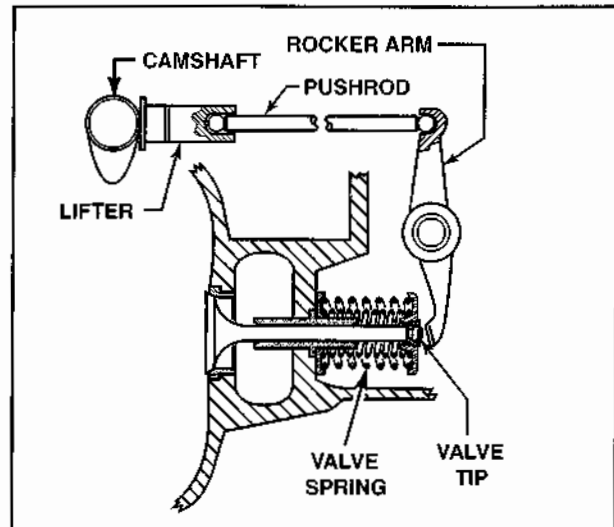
The typical valve operating mechanism includes a camshaft (or cam ring), a tappet (or lifter), a push rod, and a rocker arm.
